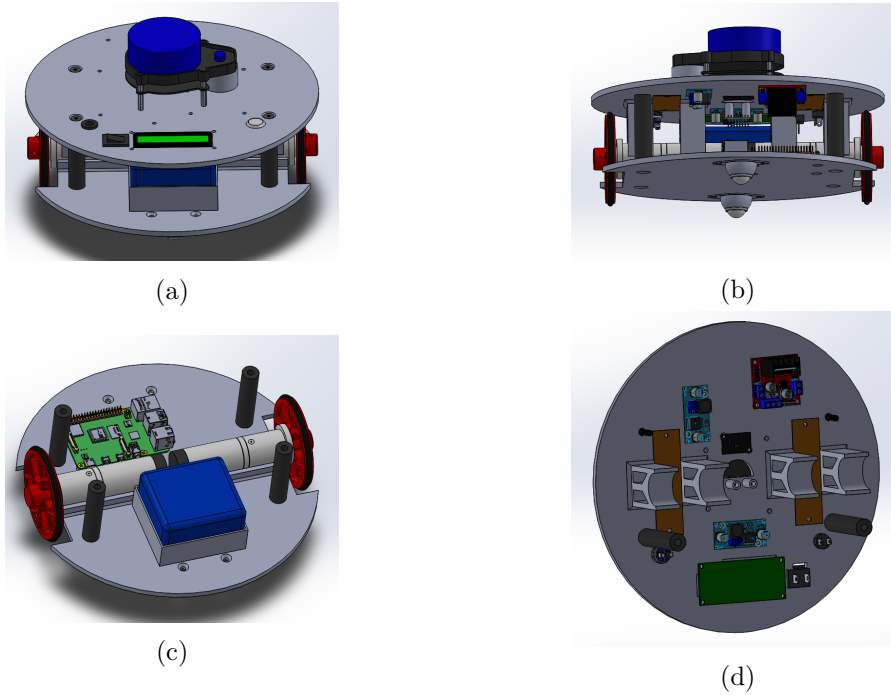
Definitive prototype: (a) Top front face of the robot assembly, (b) Back bottom face of the robot assembly (c) Base + Electronic components, (d) Roof + Electronic components.
